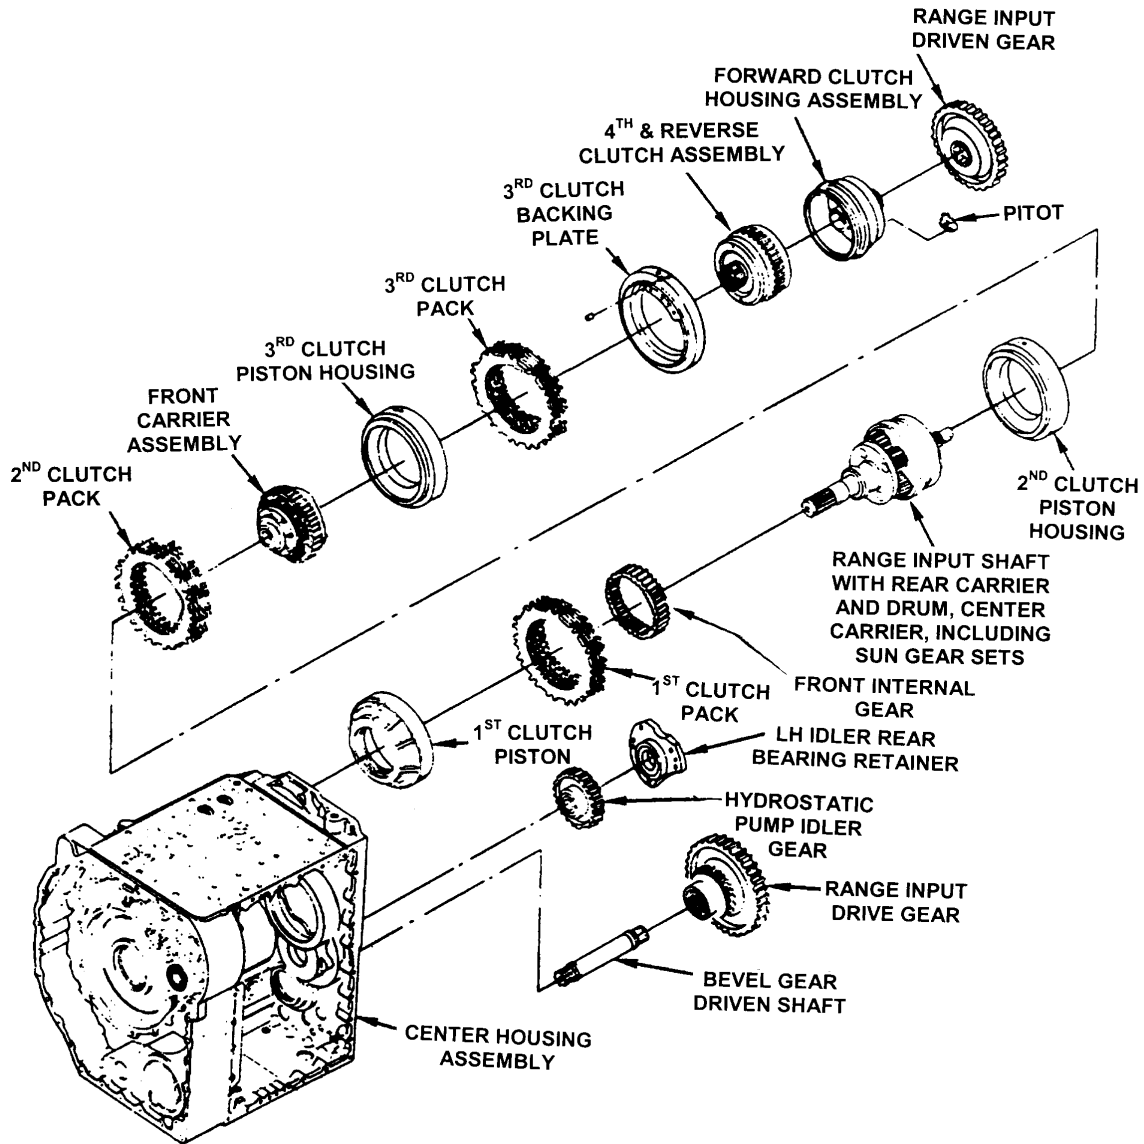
Exploded View of Major Components, Left Side of Center Housing Assembly.
